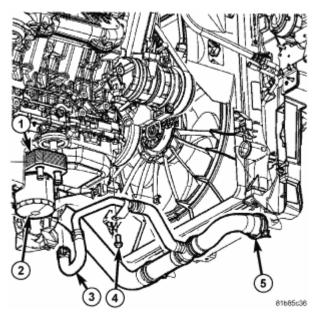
Engine Oil Cooler, Coolant Hose, Filter & Lower Radiator Hose
